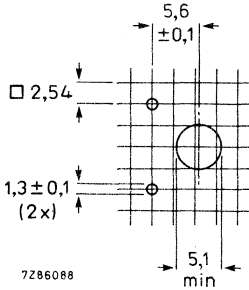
Hole pattern for mounting on a printed-wiring board.
